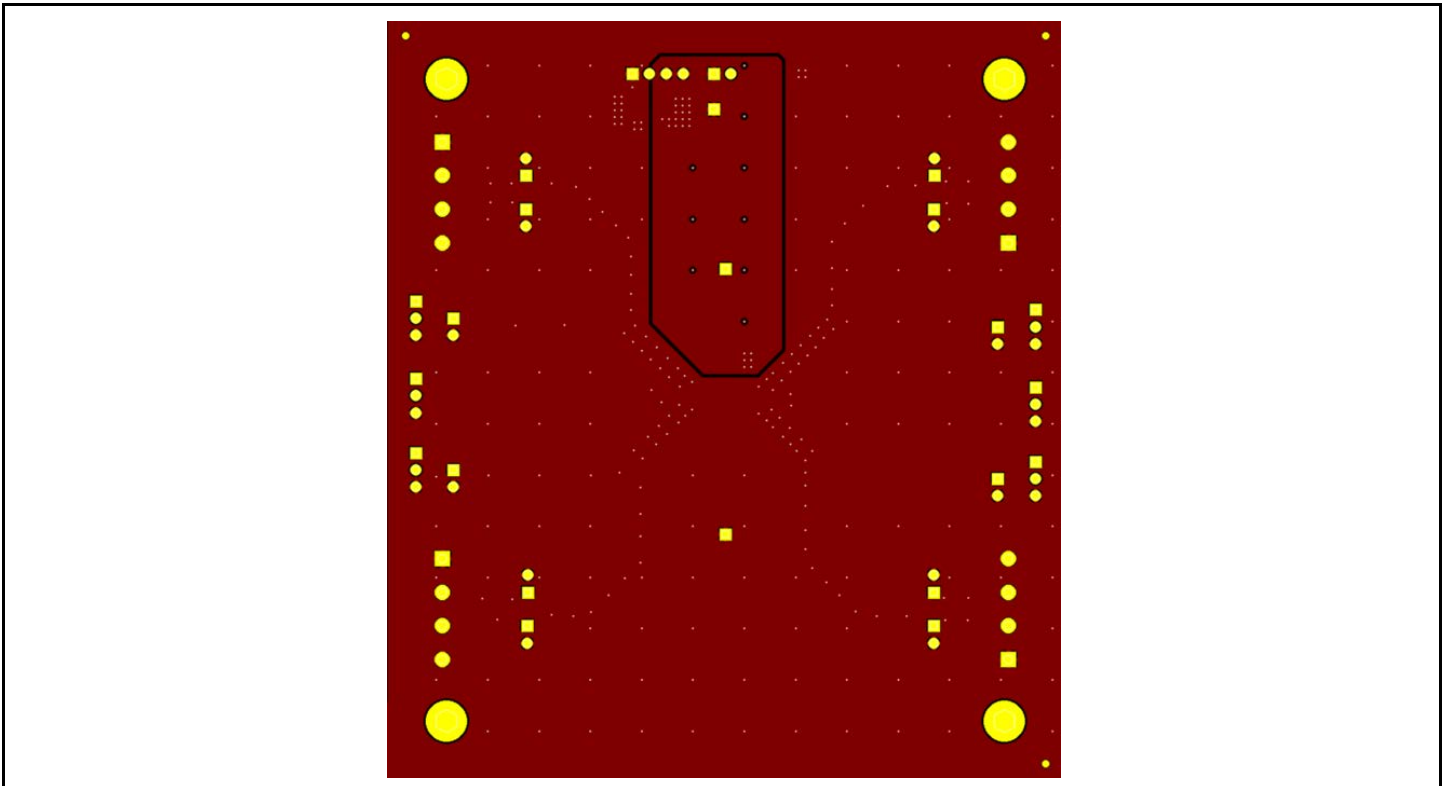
EVK PCB Layer 1—Top View (TSSOP16)
